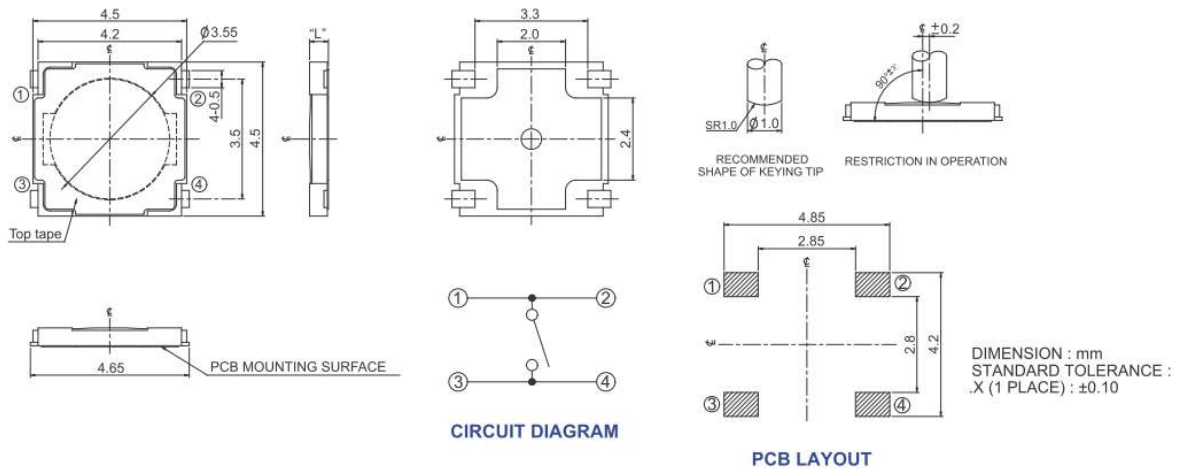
223BM2VA..., Surface Mount Gull Wing Type 2, Flat surface
